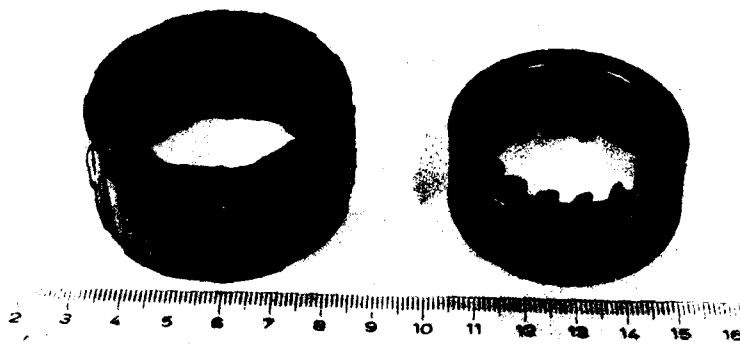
FREEWHEEL CLUTCHES OF SPS GEARBOX
